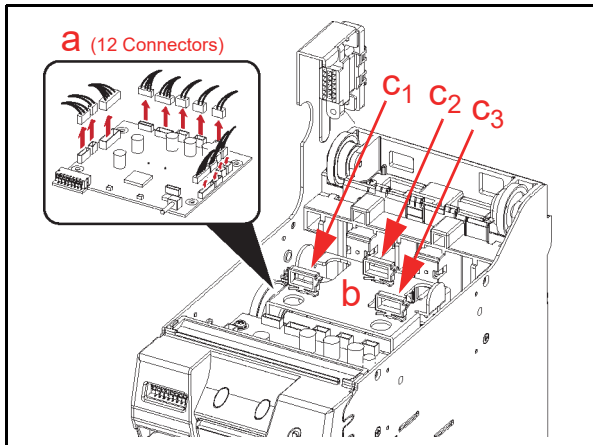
Lifter Motor Encoder Circuit Board Assembly Removal
